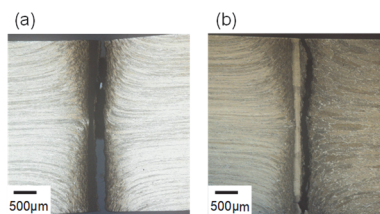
Macrostructure of the fractured interface of the friction welded joints after tensile test. (a) As-welded and (b) T6 heat treatment
